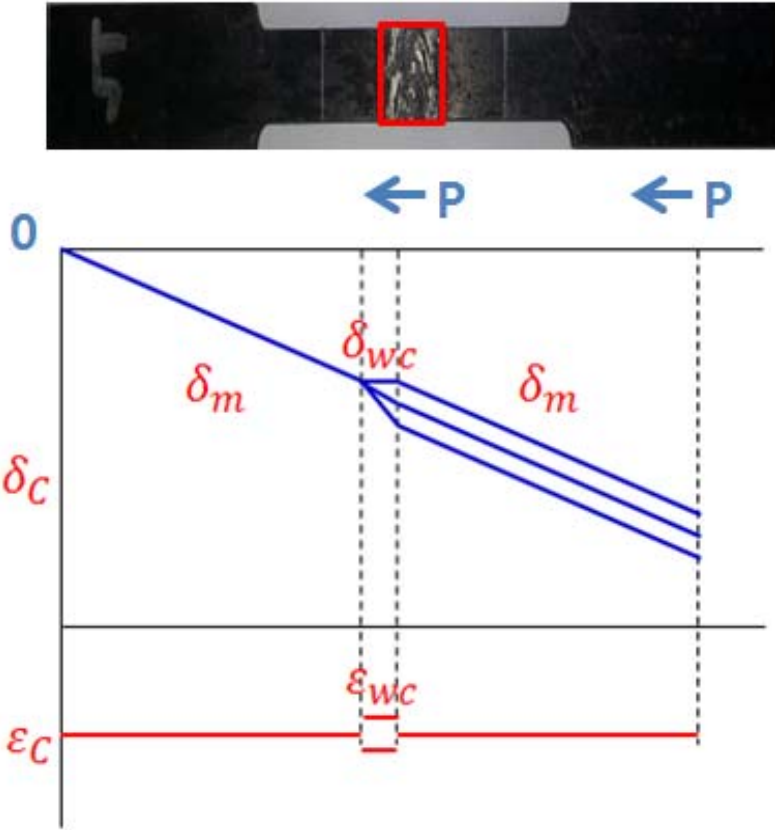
Concept of measuring residual stress produced by welding
